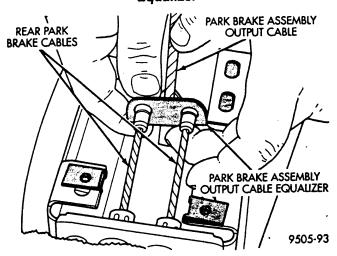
Rear Park Brake Cable Installation On Equalizer
